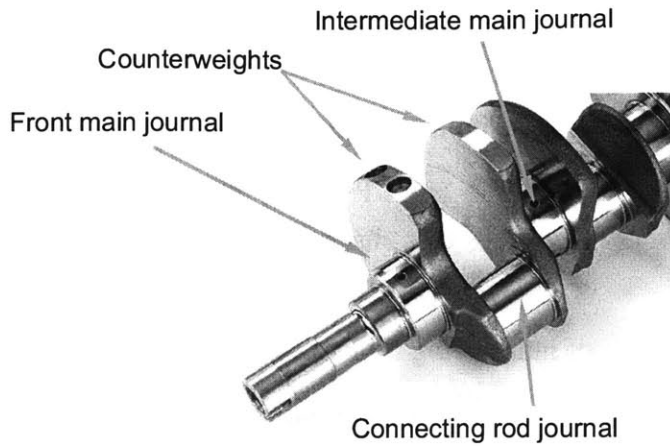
Engine crankshaft (courtesy of www.autospeed.com)
